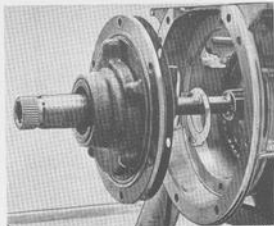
Installation sequence, front pump assembly, thrust washer and gasket
